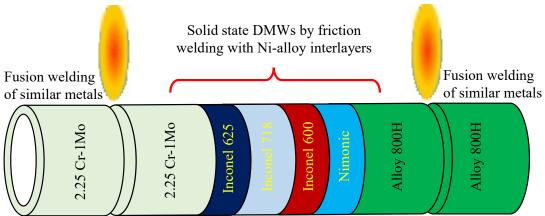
Two similar welds by fusion welding at either end of the DMW transition joint.
